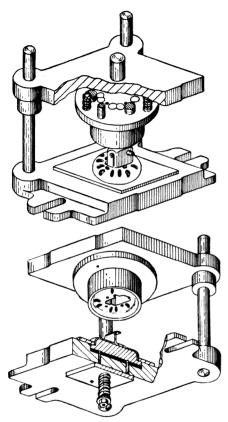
Combination trim die, which incorporates the features of both the overhead and pressure-pad trimming dies. It is used when the casting cannot be cast with one common flash line.
